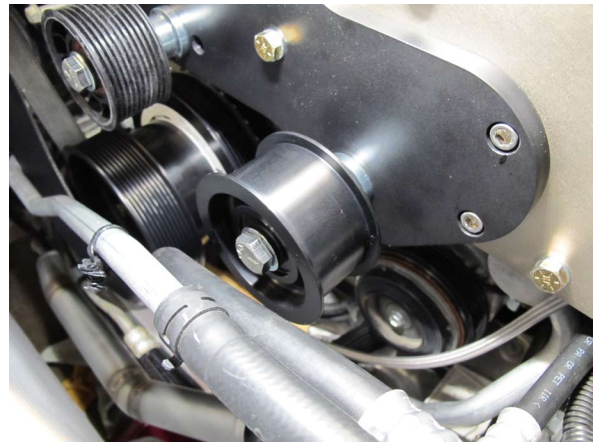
k: Install Smooth Steel Idler To Idler Plate
